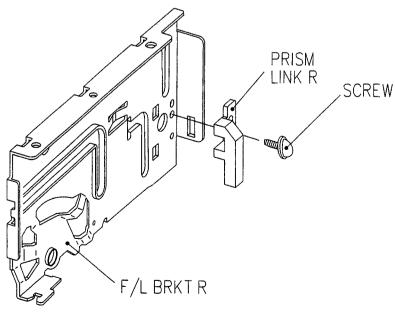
DISASSEMBLY OF THE F/L BRKT R
